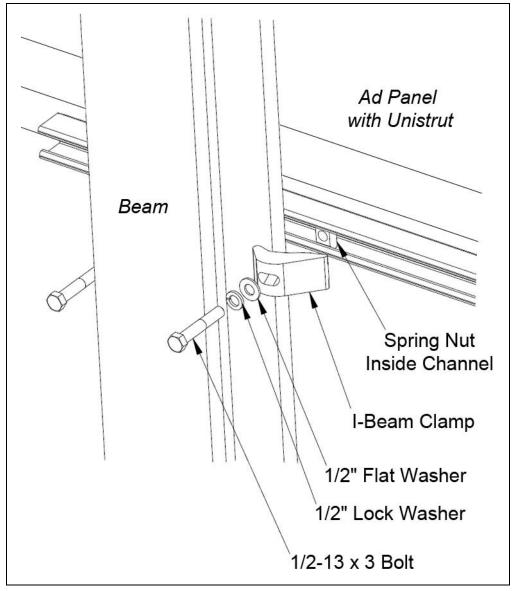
Ad Panel Mounting with I-beam Clamps, Rear Isometric View
